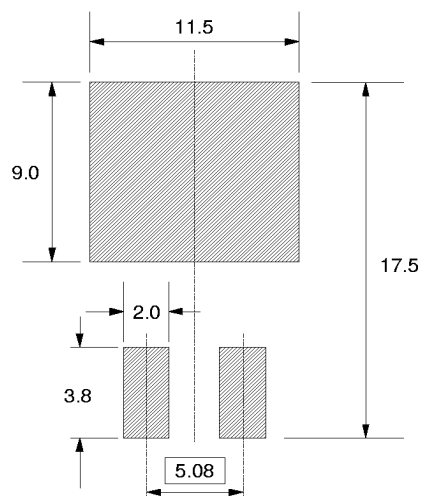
SOT404 : minimum pad sizes for surface mounting.
